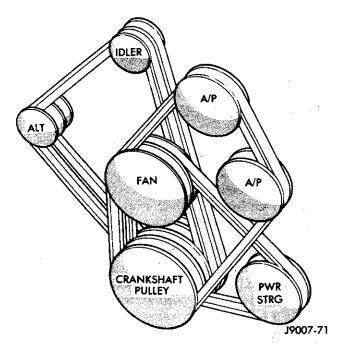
Alternator, Air Pumps, and Power Steering—Heavy Duty Cycle 5.9L Engine
